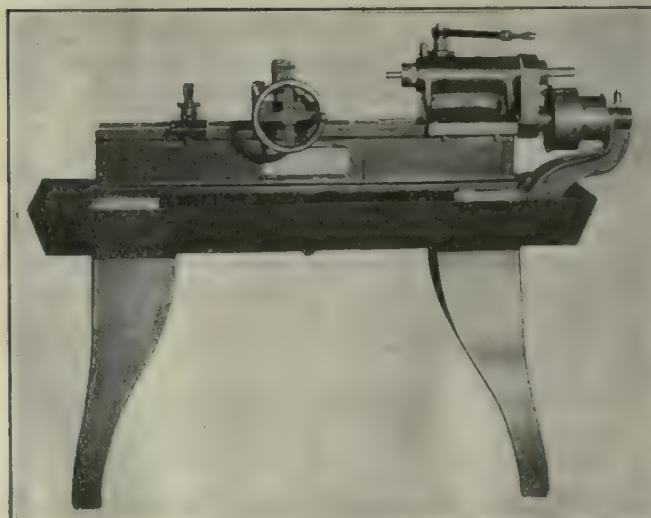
KELLY 20-IN. BACK-GEARED CRANK SHAPER WITH CONE PULLEY
